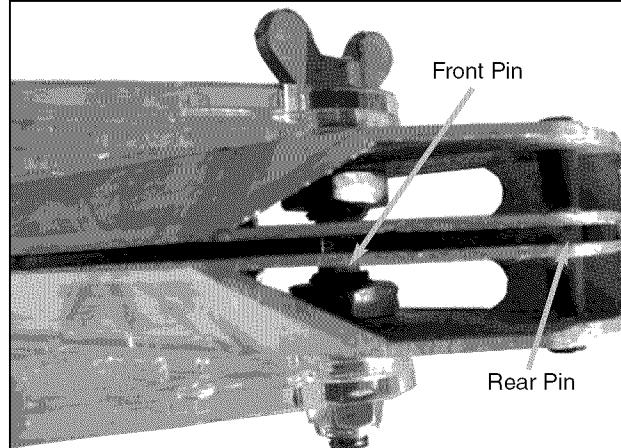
Blade Guard Has Two Pins. Insert Rear Pin Into Riving Knife First. Then Insert Front Pin Into Riving Knife.
